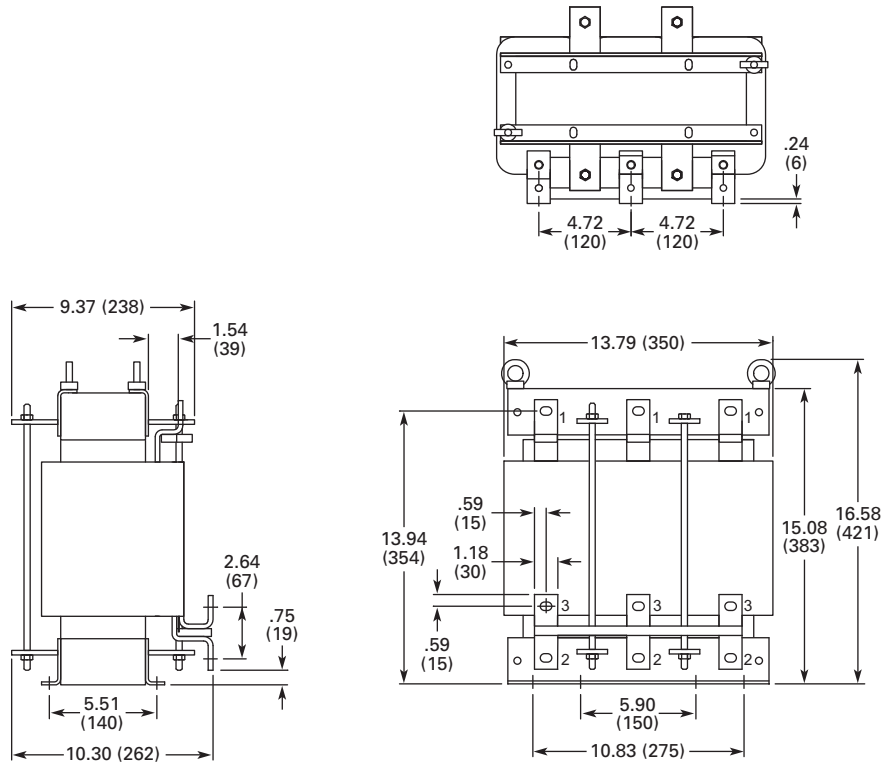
Dimensions of AC Choke CHK0400 in Inches (mm)
